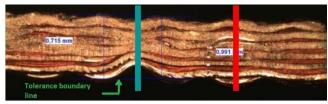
Example of weld (side view) with dimensions using microsection inspection.
